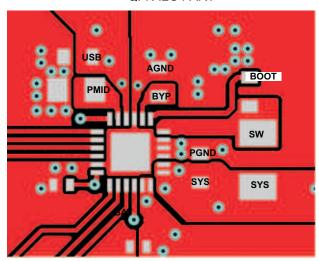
Recommended bq24270 and bq24271 PCB Layout
